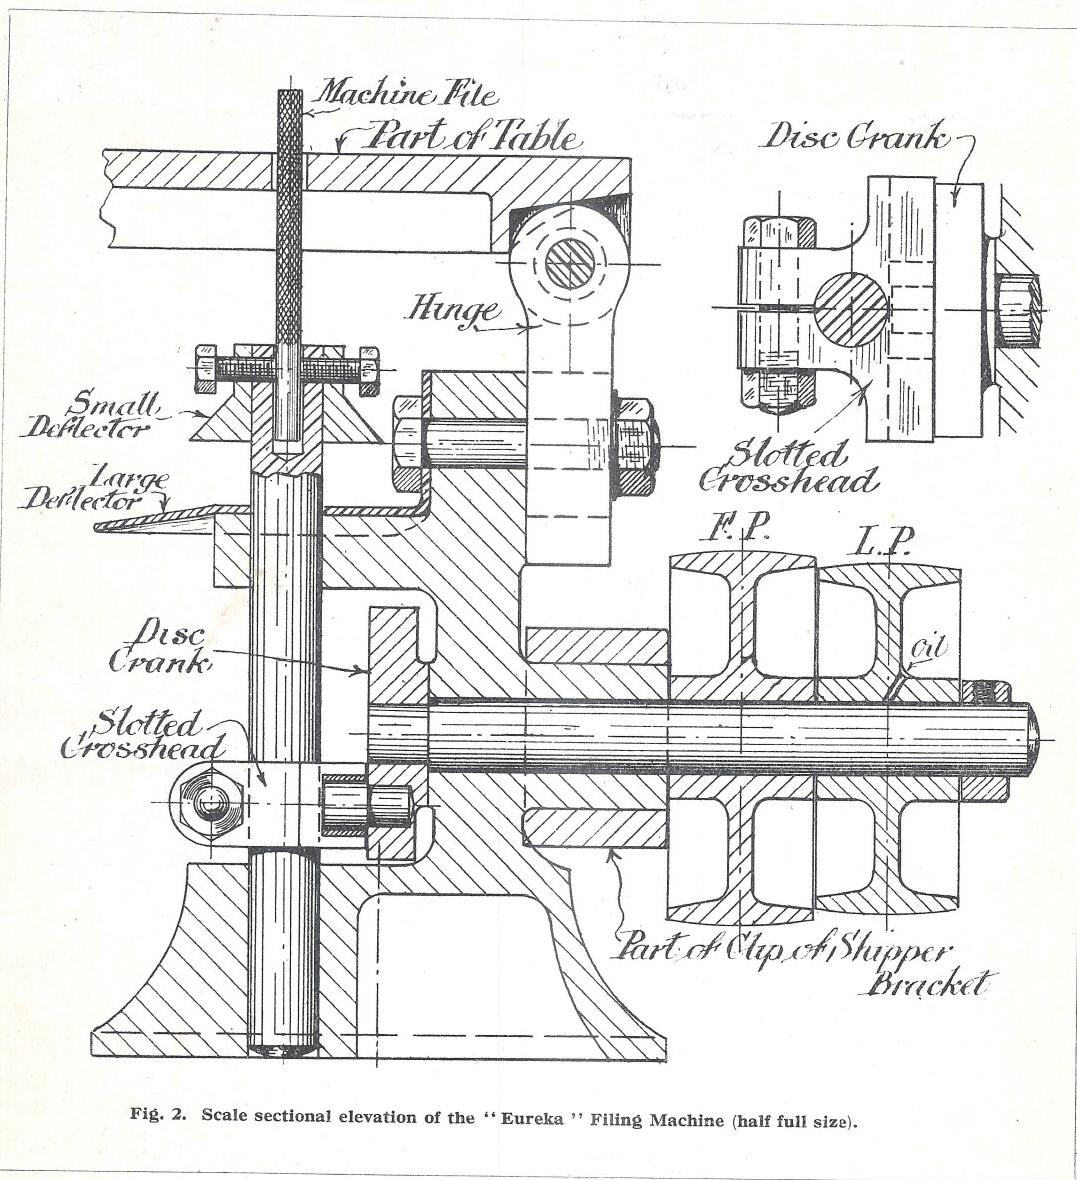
Scale sectional elevation of the "Eureka" Filing Machine (half full size).
